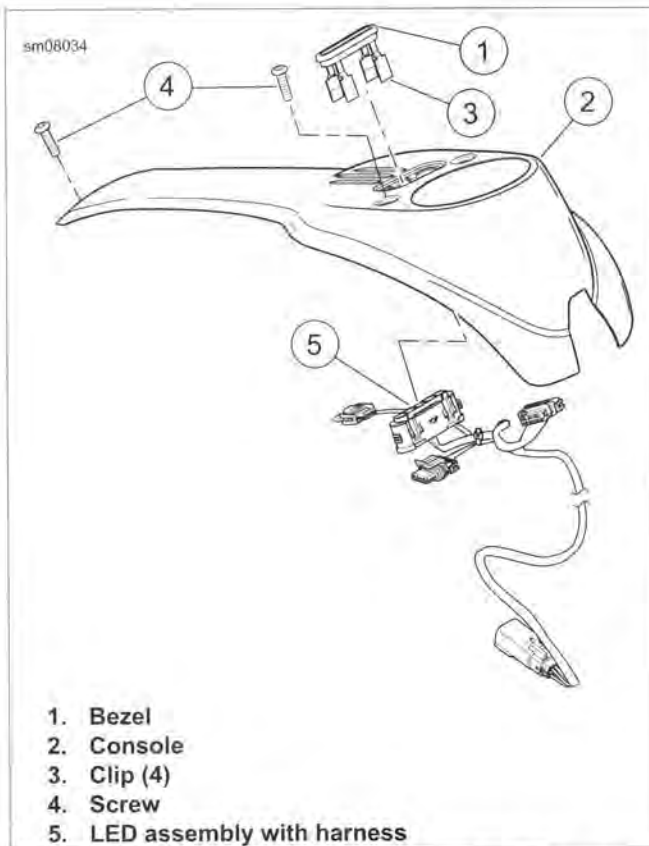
Indicator Lamp Assembly: FXDB, FXDBC, FXDBP, FXDWG and FXDF (typical)
